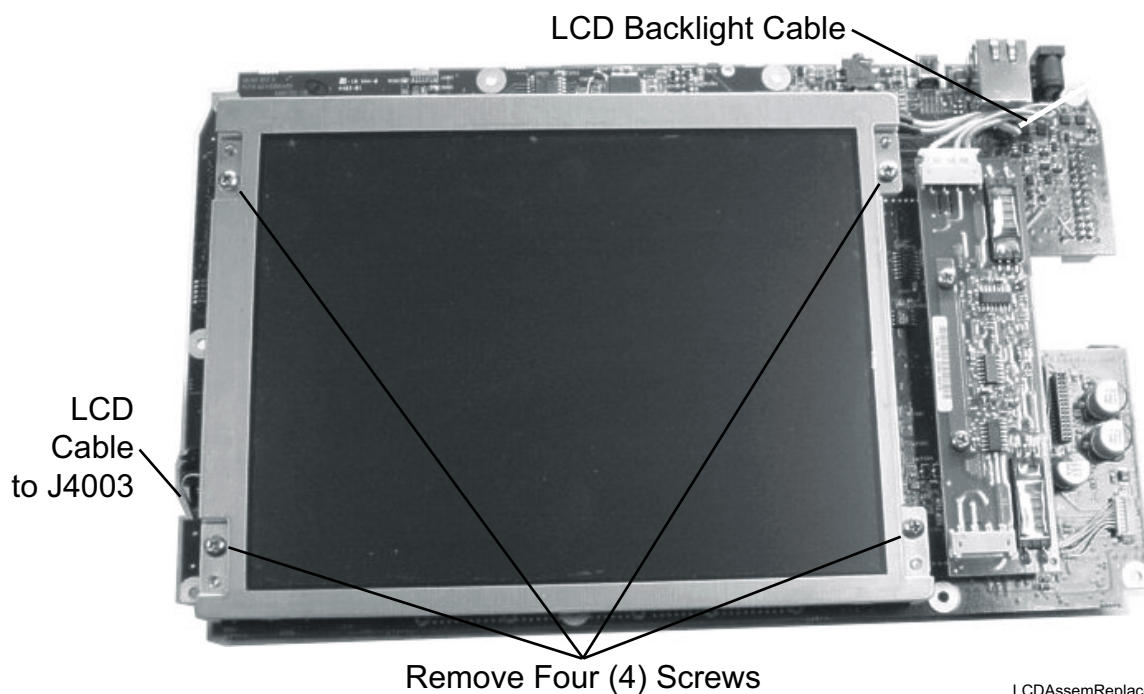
LCD Cable, Mounting Screws, and Backlight Cable
